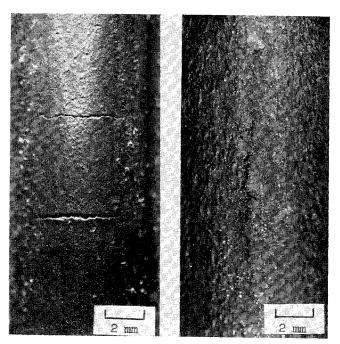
Transverse and longitudinal cracking on distressed tubes.
